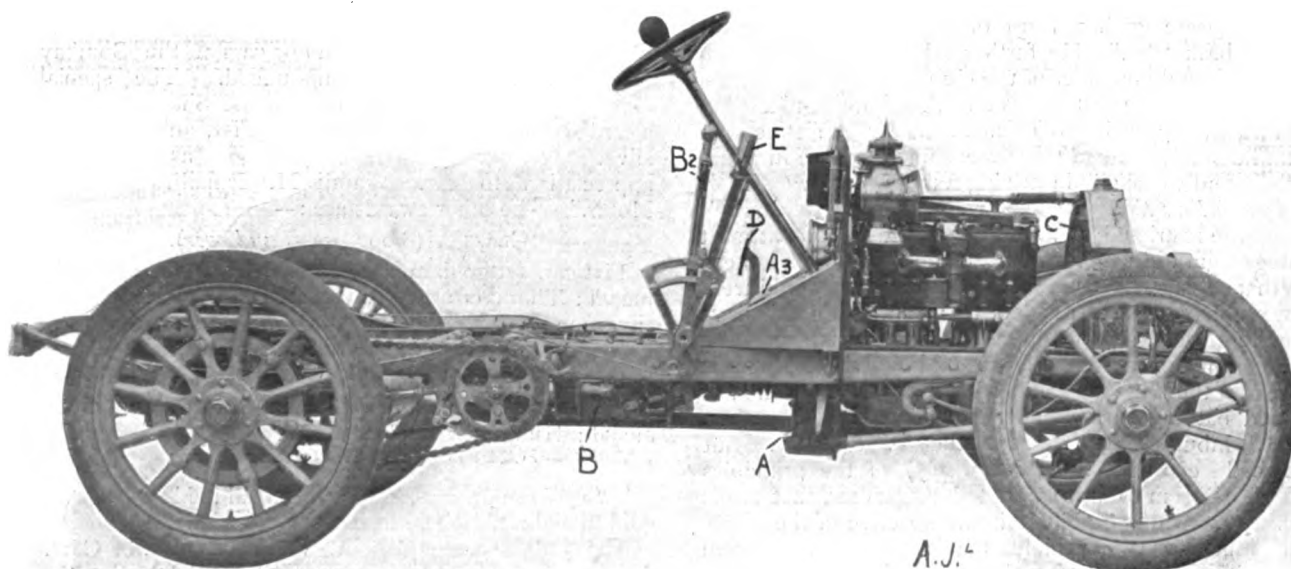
Side View of the 20-h.p. Brotherhood Chassis.
